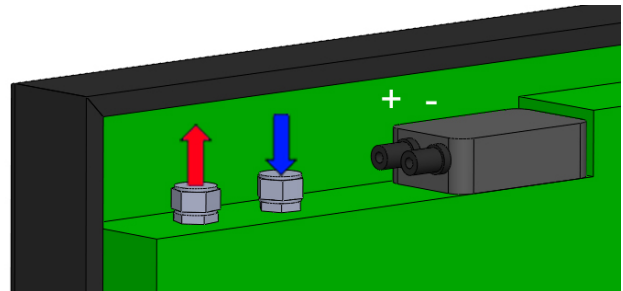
Positioning of thermal and electrical connection points at the upper right corner of the panel.
